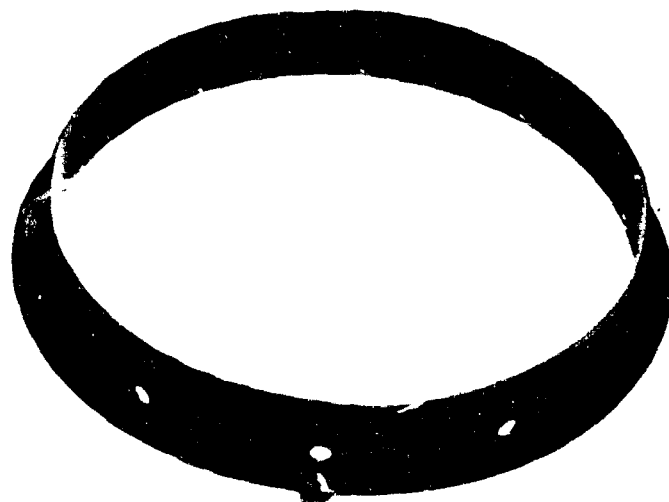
Modified Seal Loading Nut Lock Ring FE 99411
